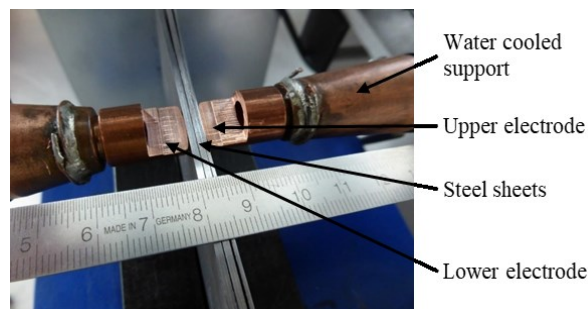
Half-electrodes squeezed at the stack border of steel sheets.
